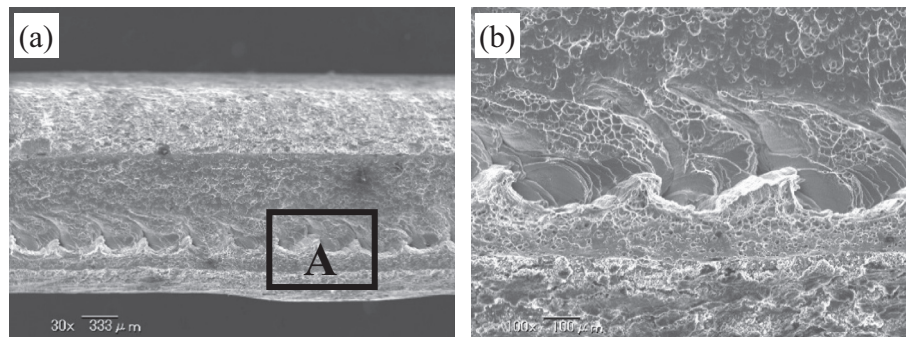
Fractured surface of the joint failed in the stir zone (SEM): (a) fractured surface and (b) A zone (500 rpm – 160 mm/min – 1.2 mm).
